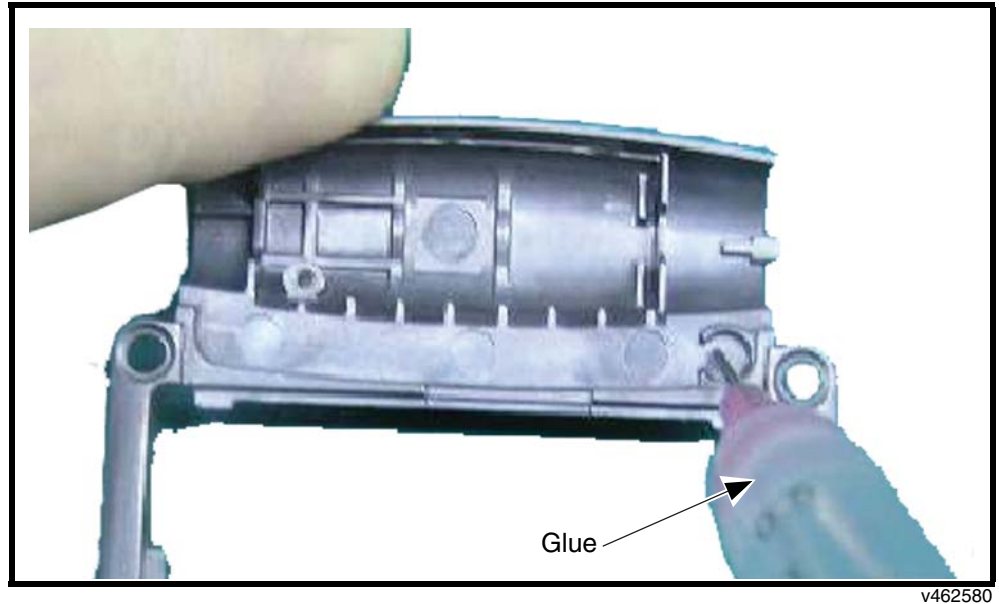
Installing Magnet Glue to the Flip Inner Assembly
